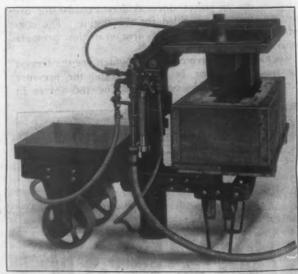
Machine After the Pattern Is Withdrawn from the Mold.
